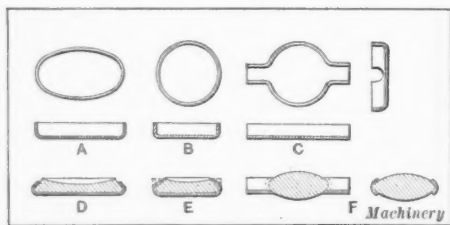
Samples of Work shown in Section. The action as compared with a double-action press tool is exactly the reverse. In the double-action press tool the blanking takes place first and is followed directly by the drawing. In this tool, the drawing or cupping takes place first, and the blanking or pinching last.
